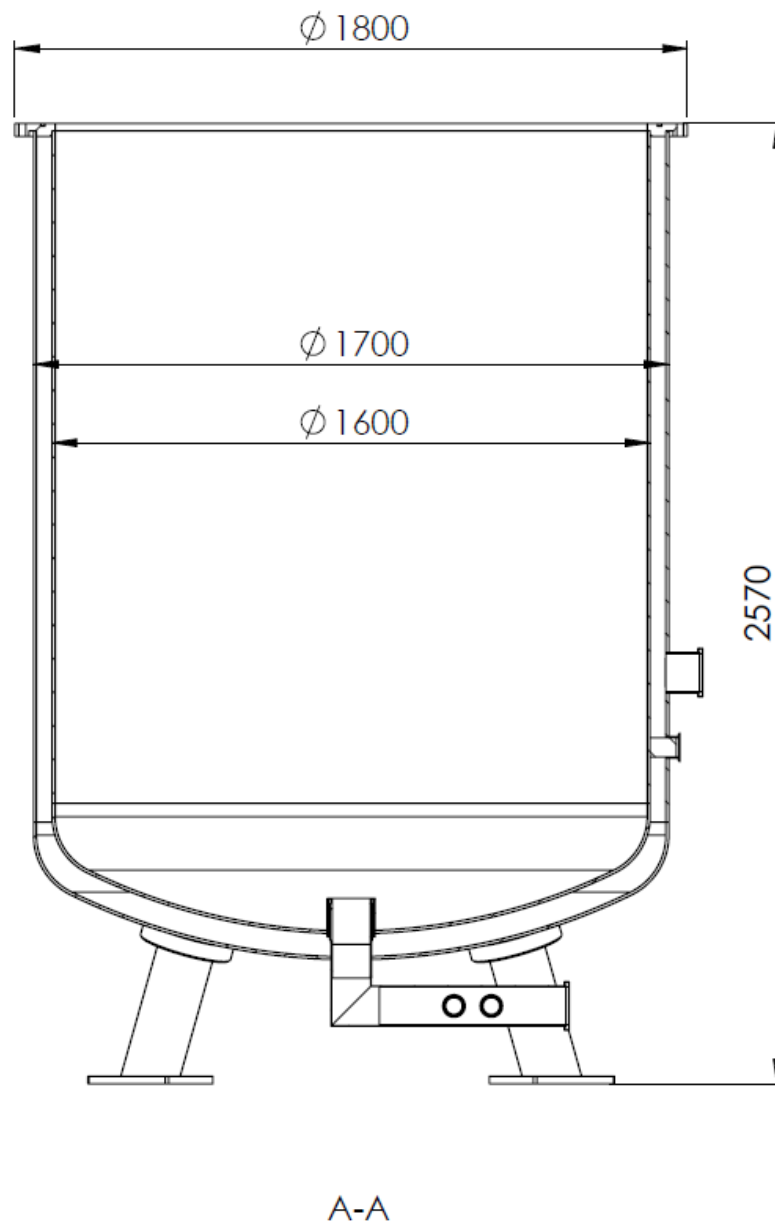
Schematic drawing of the double wall vacuum vessel with ISO-K 100 flanges.
